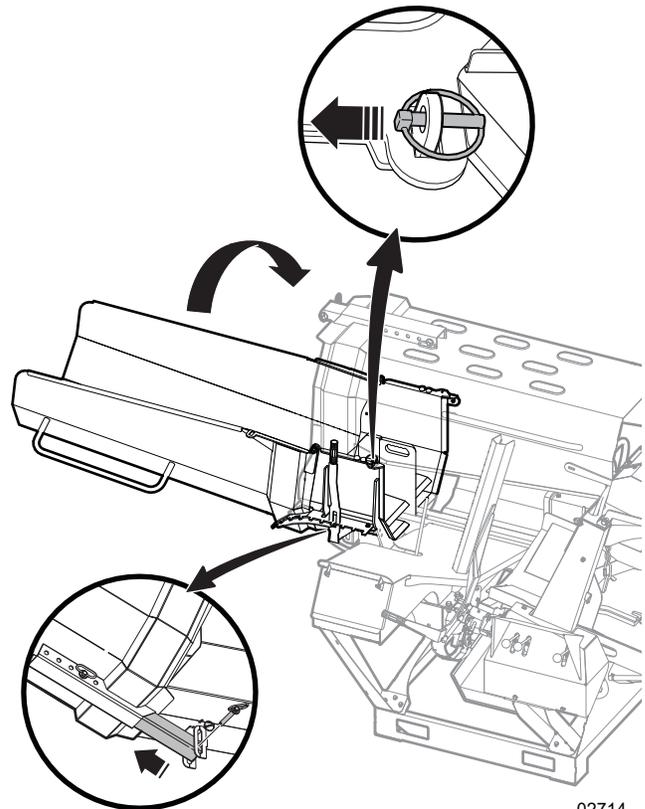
Use the latch bar and linchpin to hold the chutes in the folded position
